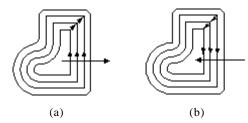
Tool path: (a) spiral-out and (b) spiral-in
